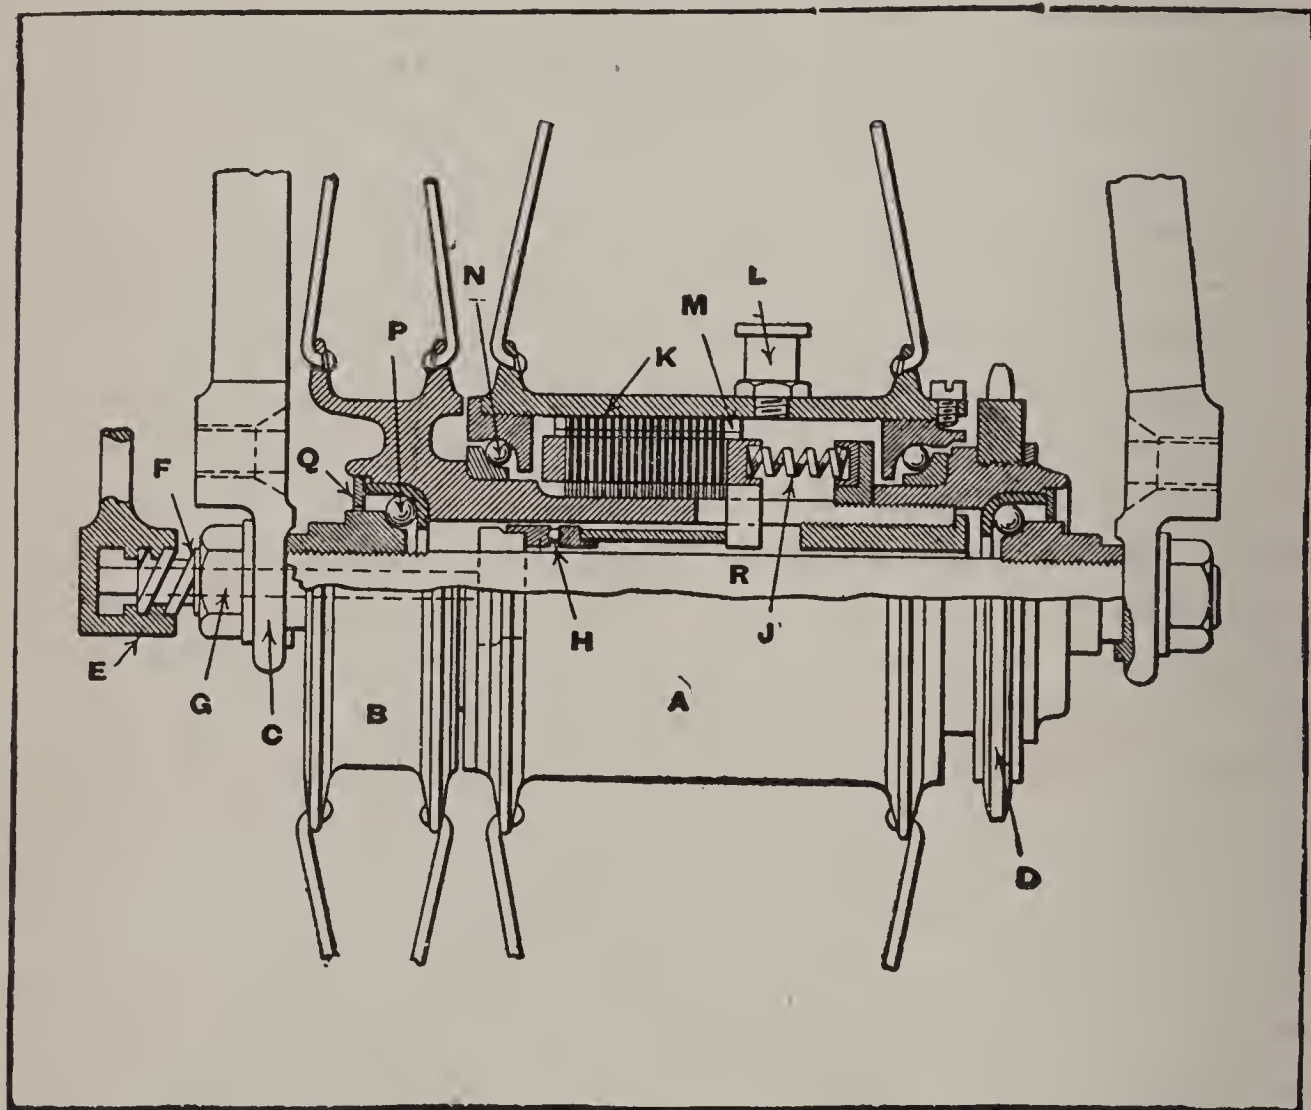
Detailing Construction of the Rex (English) Free Engine Clutch Forming Part of the Rear Hub.
